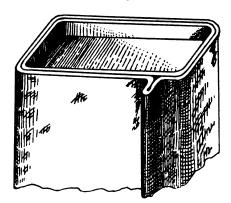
THE WELD IS NOT MADE AT THE CORNER
